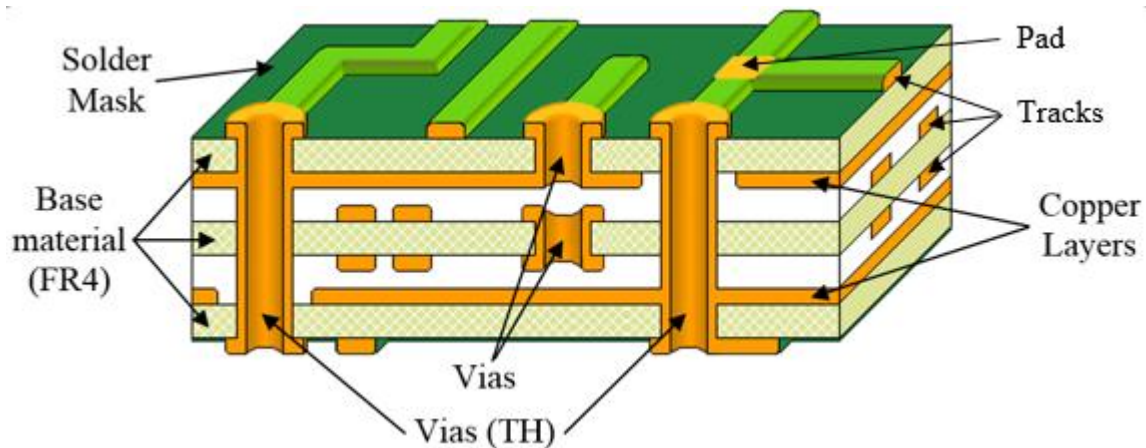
Constitution of a multilayer PCB (Adapted from [20]).
